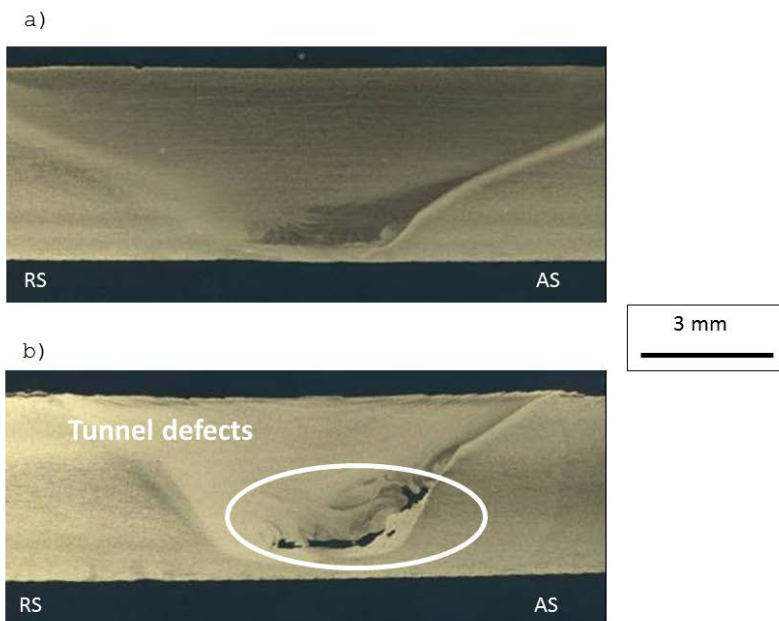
Optical macrographs of transverse metallographic cross-sections for (a) 400 RPM/2 IPM showing a full penetration defect free weld and (b) 400 RPM/7 IPM showing tunnel defect formation at a higher tool traverse rate. (RS=retreating side, AS=advancing side)
